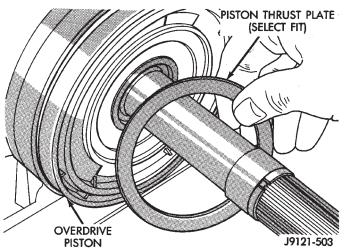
Removing Overdrive Piston Thrust Plate-46RH
